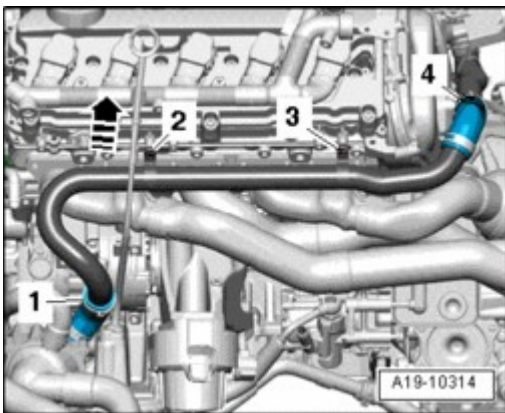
Removing Bolts, Oil Dipstick Guide Tube Upward & Loosening Hose Clamps And Removing
